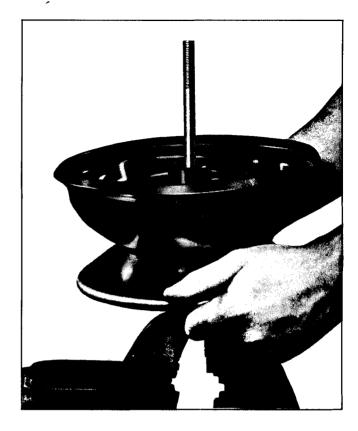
A-8 Positioning Power Piston on Support Plate Remover
